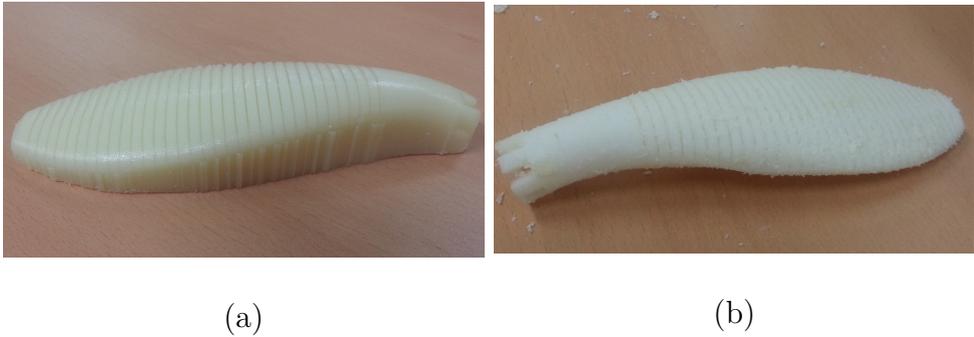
3D Printed head (a) before and (b) after the support is removed.
